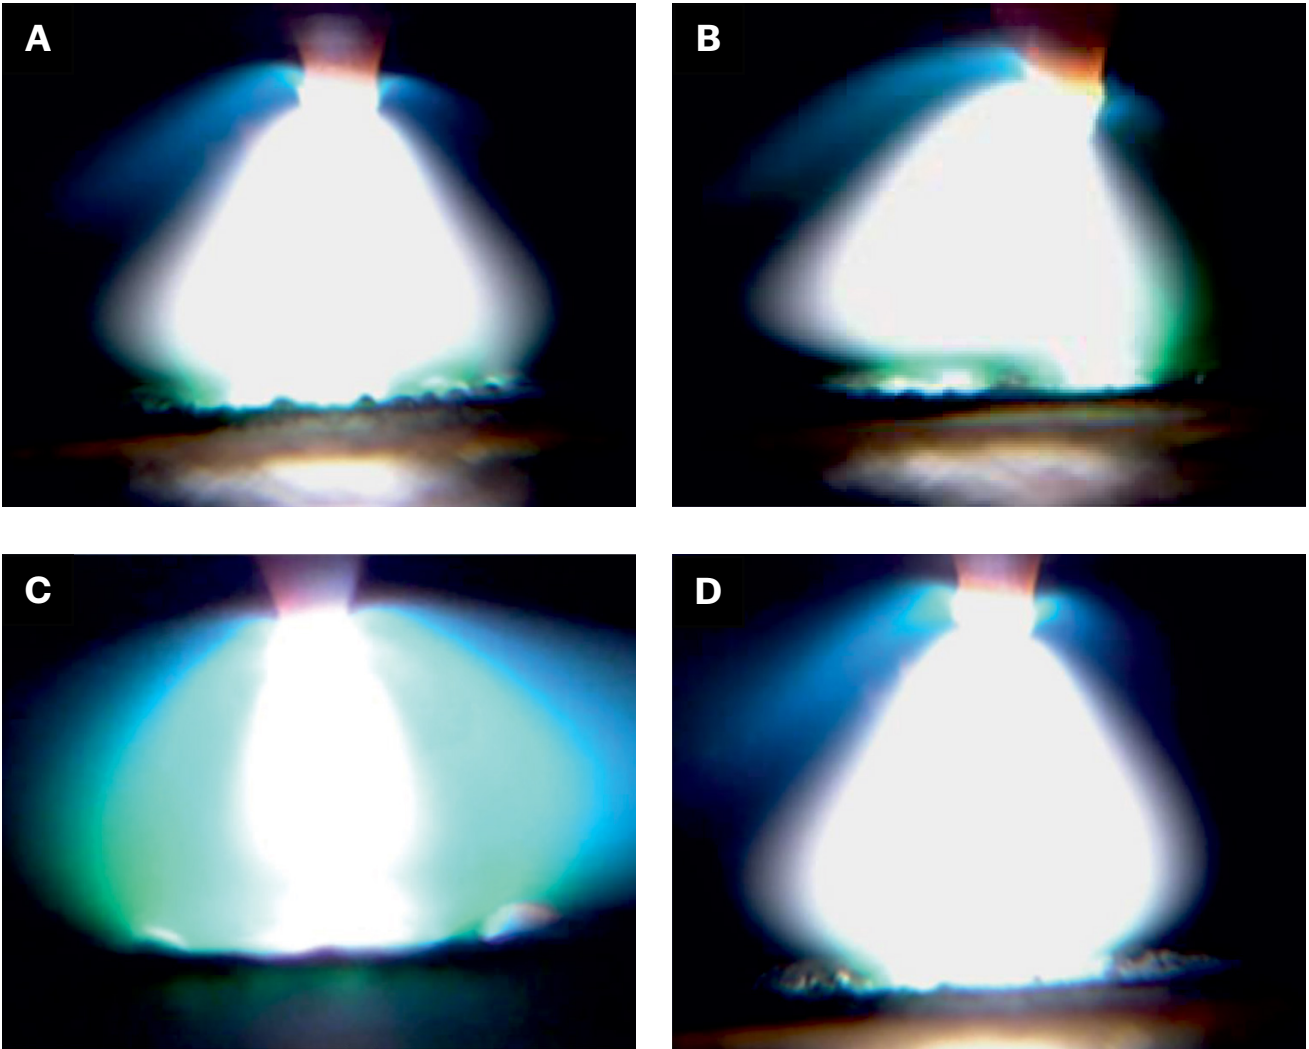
Shape of the arc column: A — Without USV; B — USV on the electrode; C — USV in the arc column; D — USV in the welding pool.
